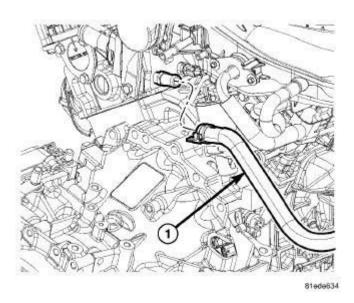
Heater Hose From Engine Coolant Outlet Courtesy of CHRYSLER LLC
